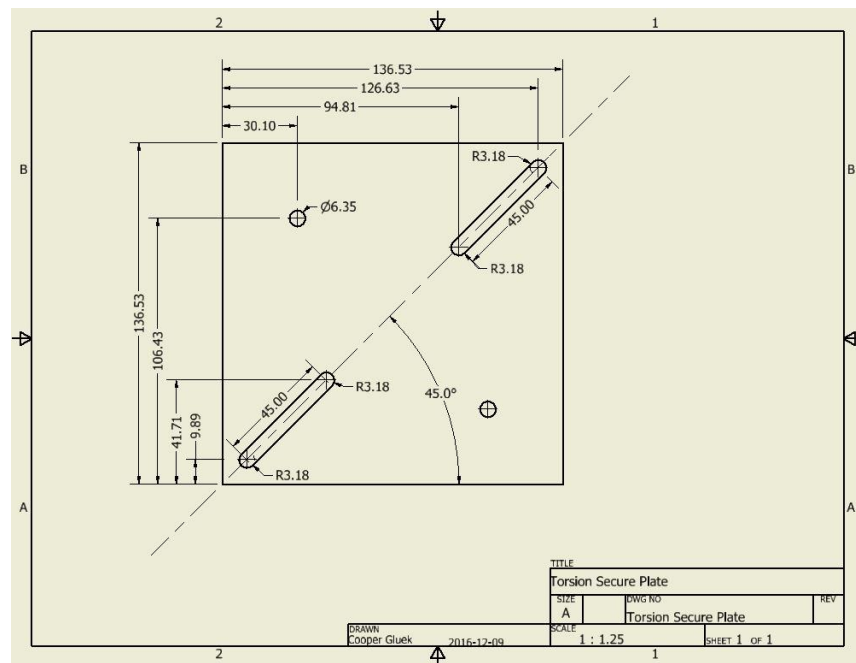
Dimensional Drawing of Torsion Secure Plate
